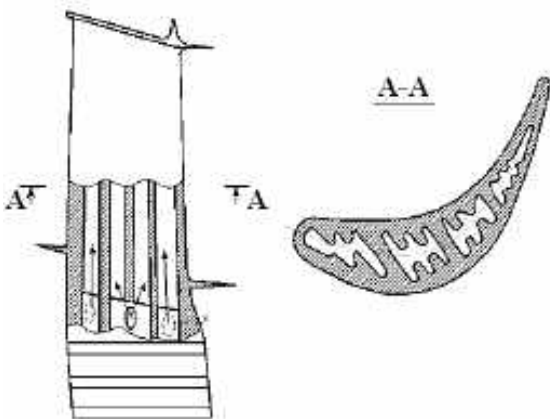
The engine D-36 HPT rotor blade cooling
